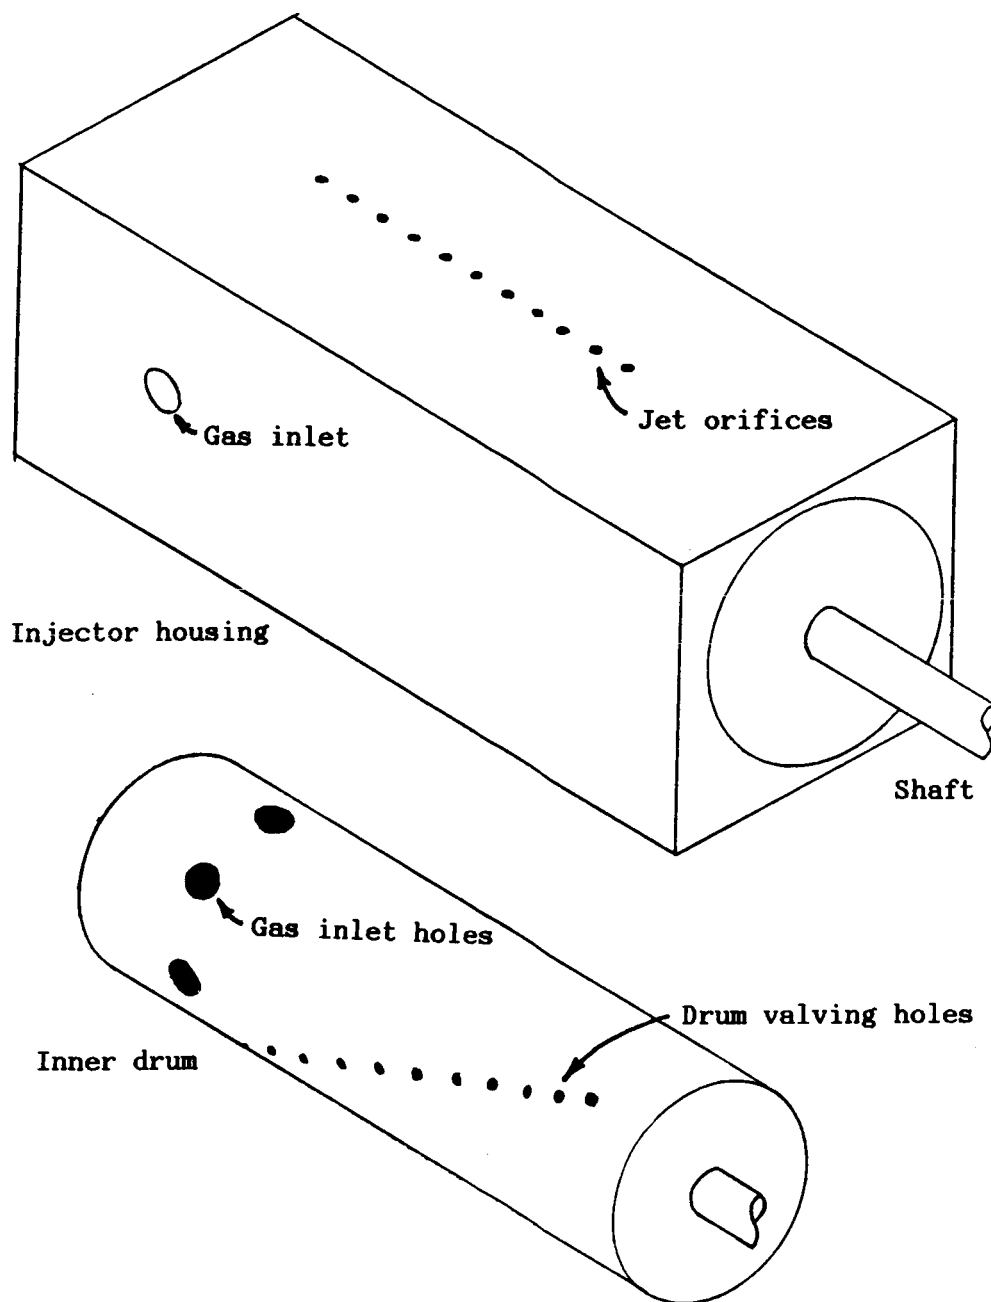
Housing and inner drum of proposed jet injector design.
